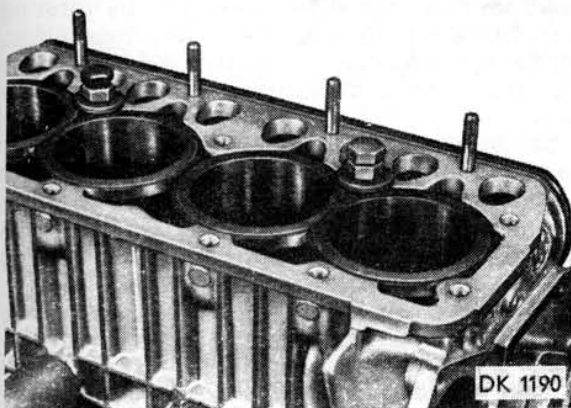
/9 - Locking Cylinder Liners in Position Using Bolts and Washers
